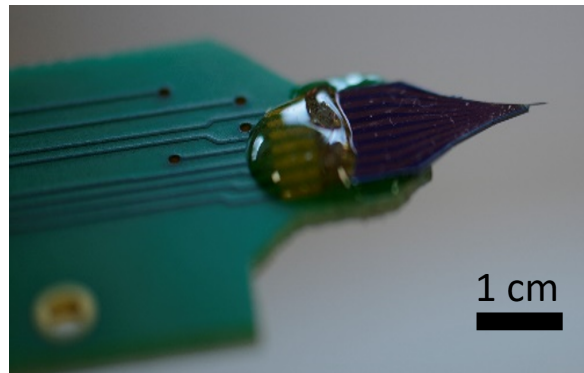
Magnetrode mounted on a PCB. The contacts pad of the magnetrode are connected to the PCB by wire-bonding. The thin wires are protected by araldite.
